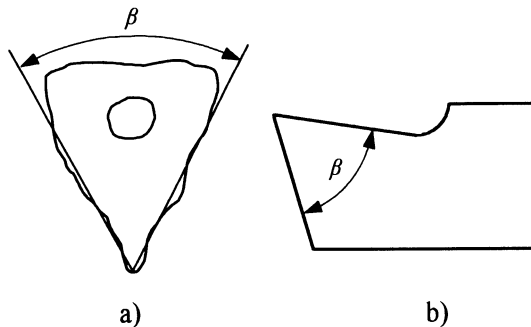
Wedge angle of the a) stone age tool, and b) modern tool
